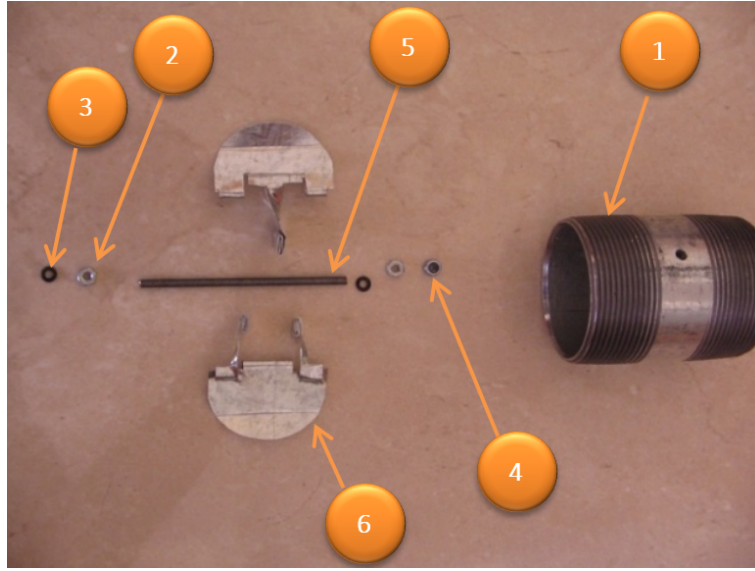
RDZ1 check-valve prototype (exploded view).
